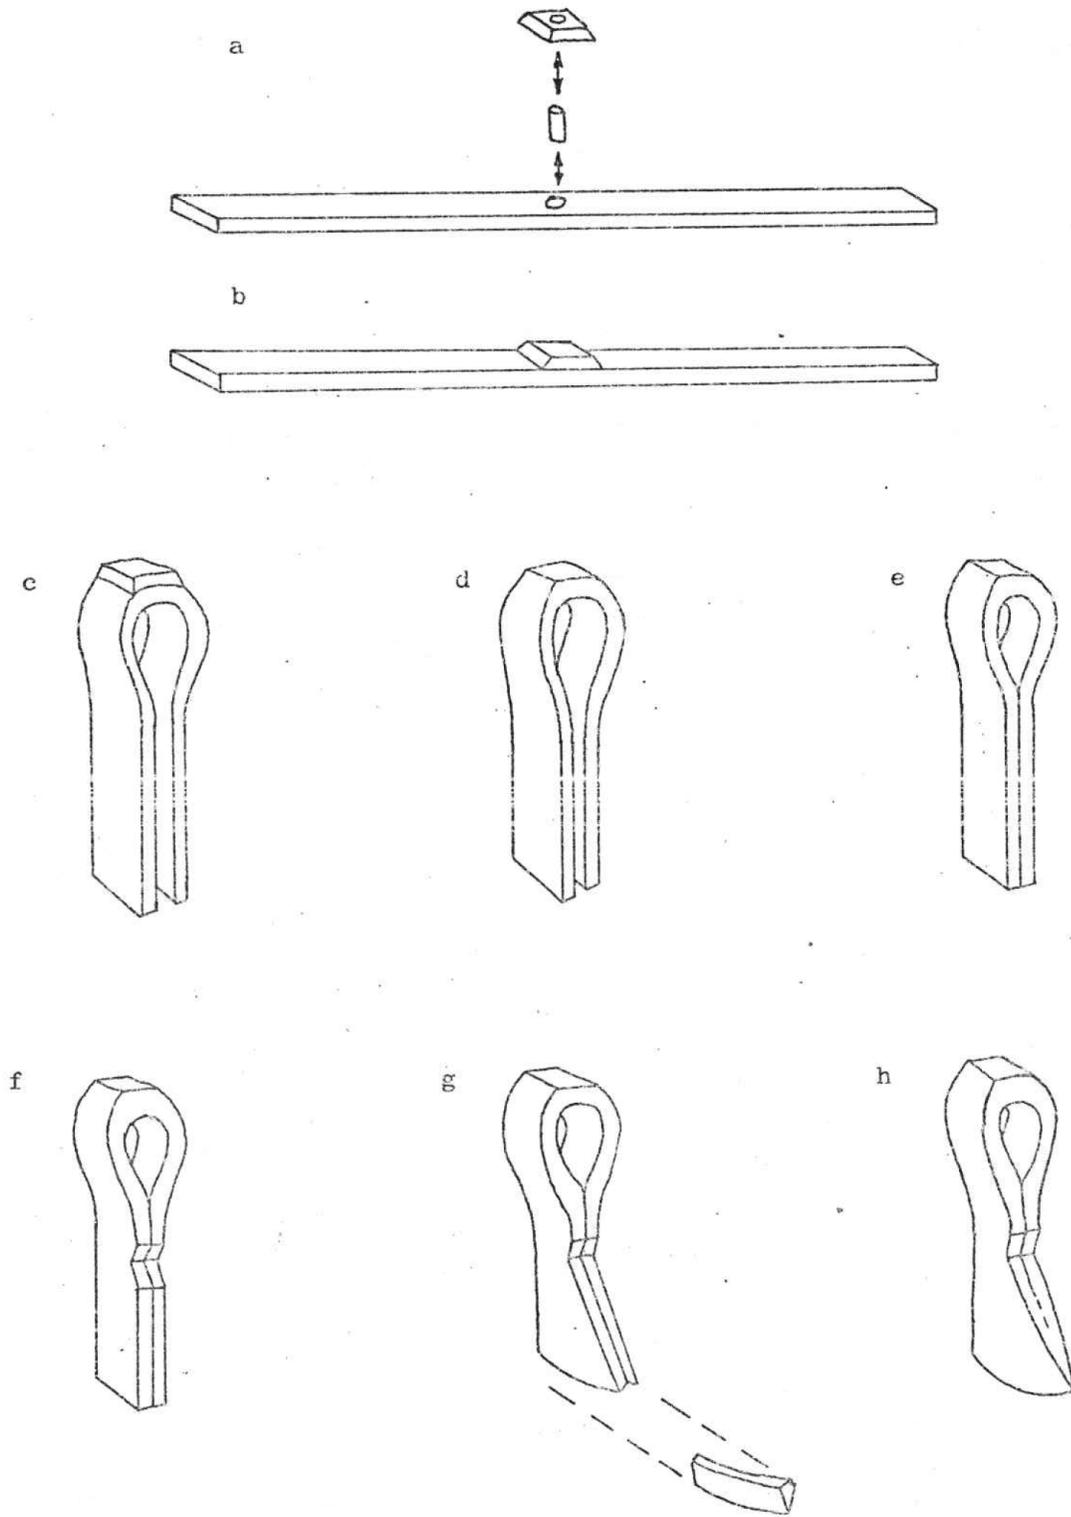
Square head, double-piece axe (FOVA Type 2).
